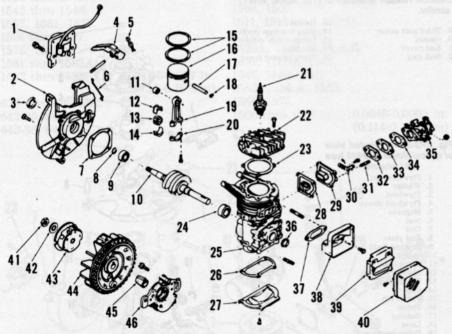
Exploded view of typical Model AH520 type 1600 engine. Model AH600 is similar.
